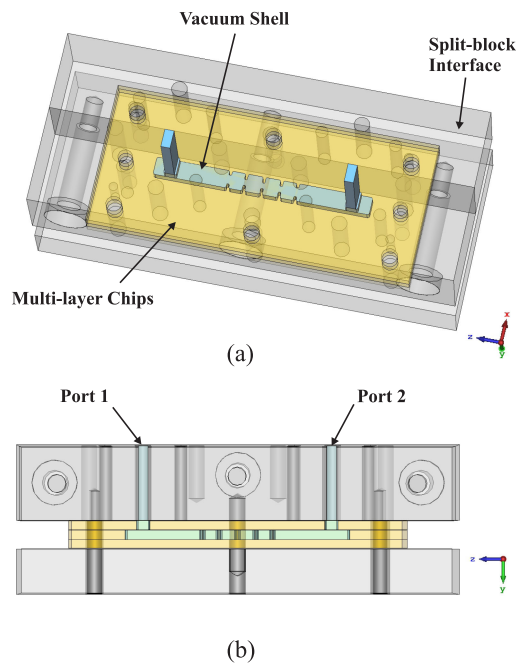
CAD model view of the metallic split-block interface and filter component package. (a) A perspective view of the assembly and (b) a front view of the assembly. Gray indicates the metallic split-block interface, orange indicates the filter component, and blue highlights the vacuum structure.
